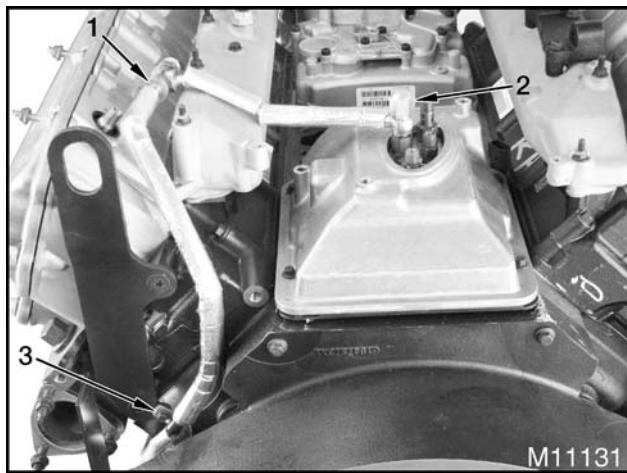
High-pressure pump to cooler tube assembly — upper connection
